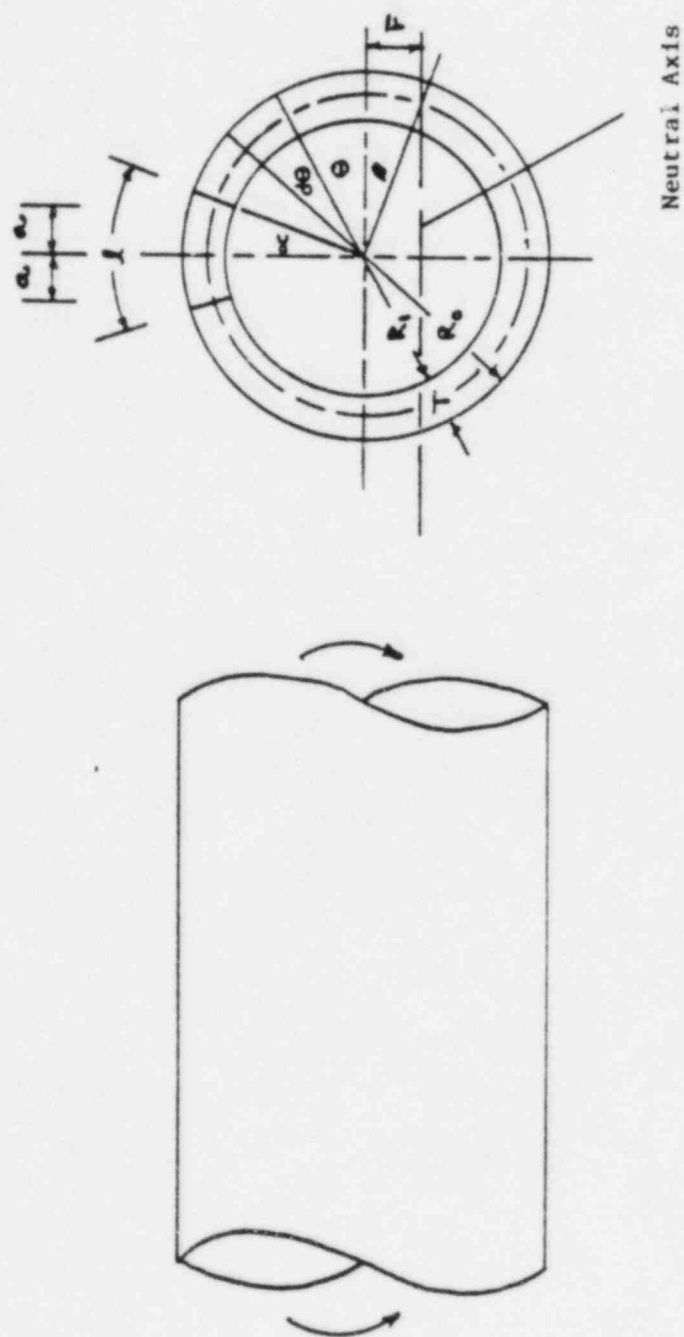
Pipe With a Through-Wall Crack in Bending
